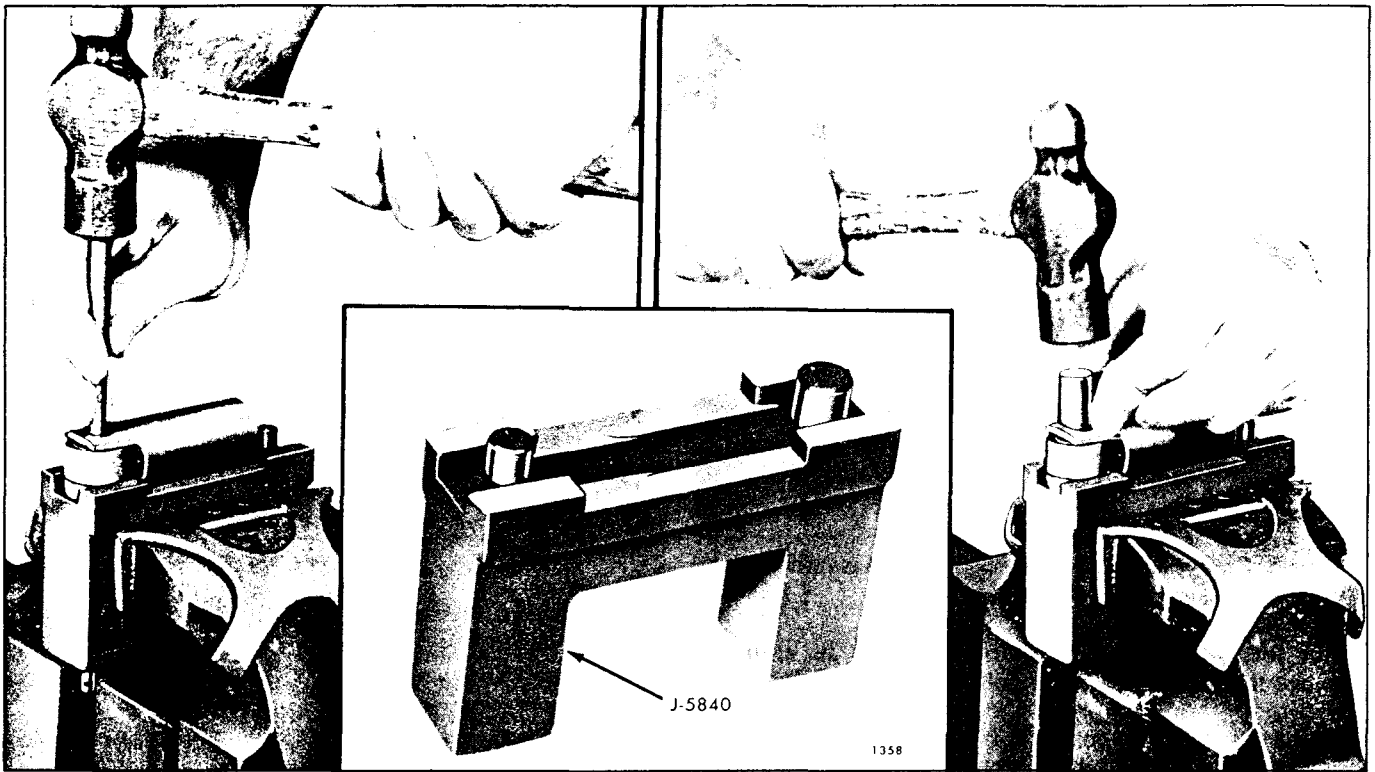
Removing or Installing Cam Follower Roller and Pin with Tool J 5840
